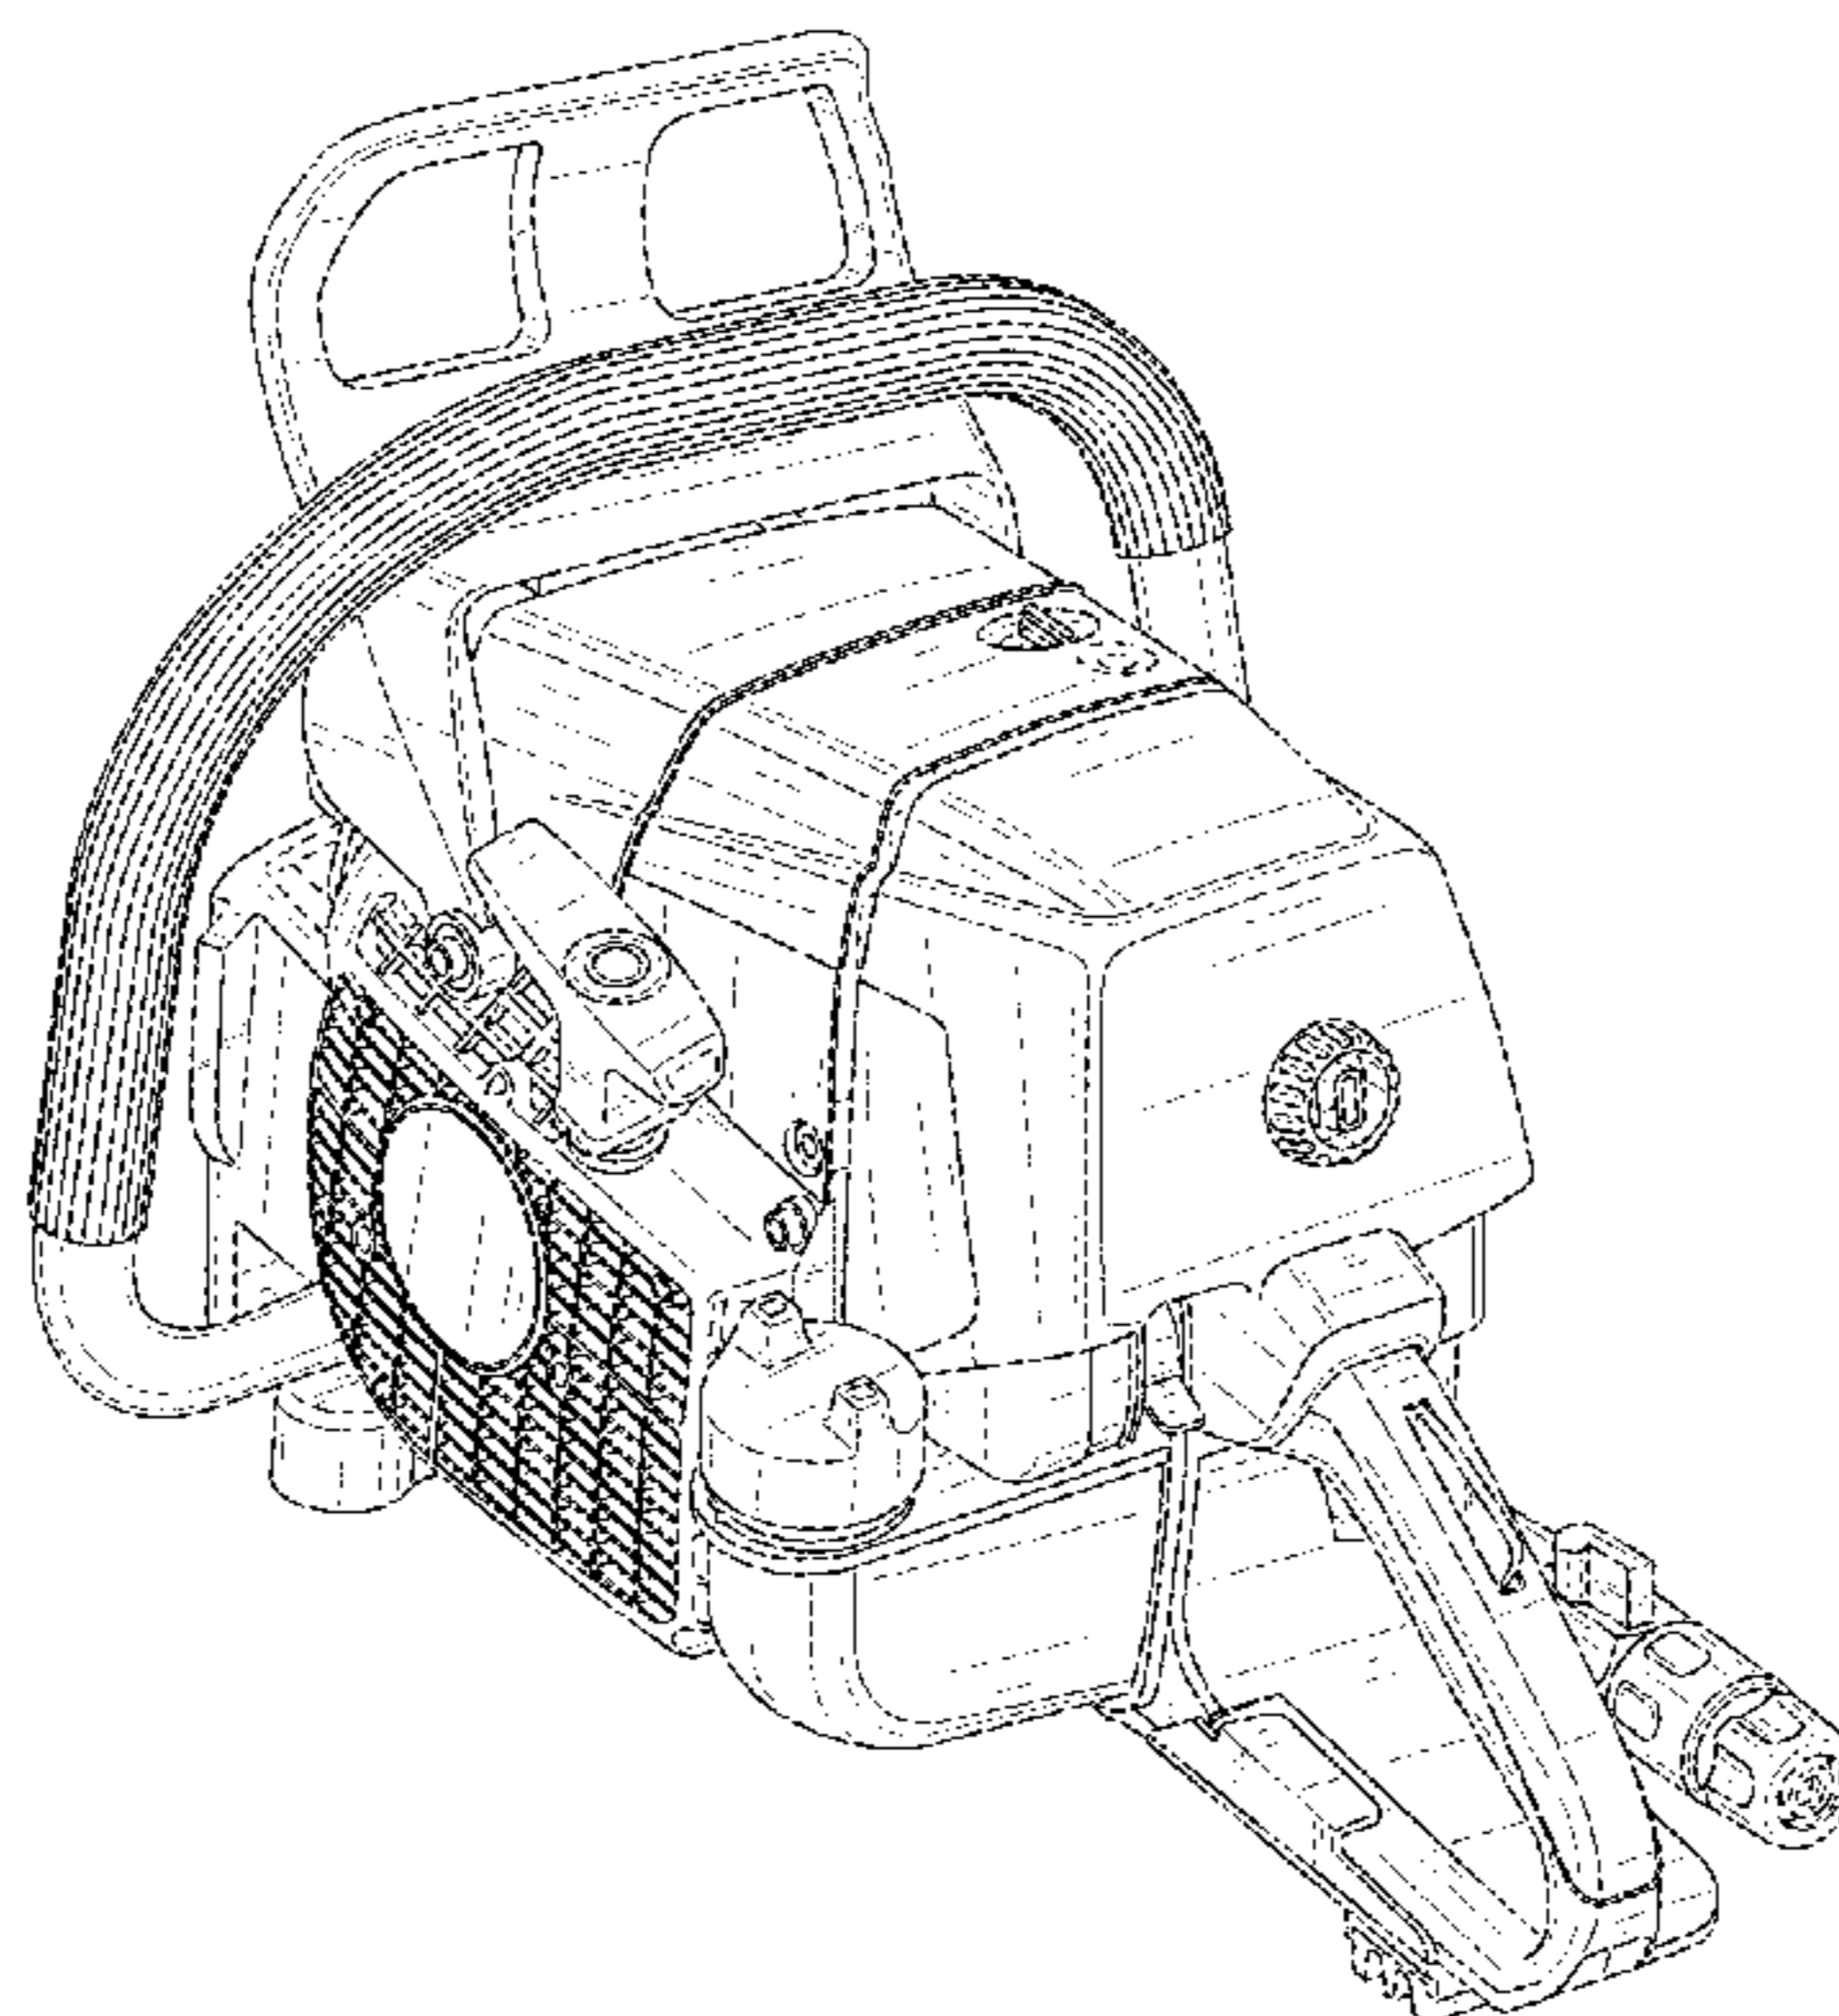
is a left side view of the chain saw for cutting stone shown in FIG. 1;
